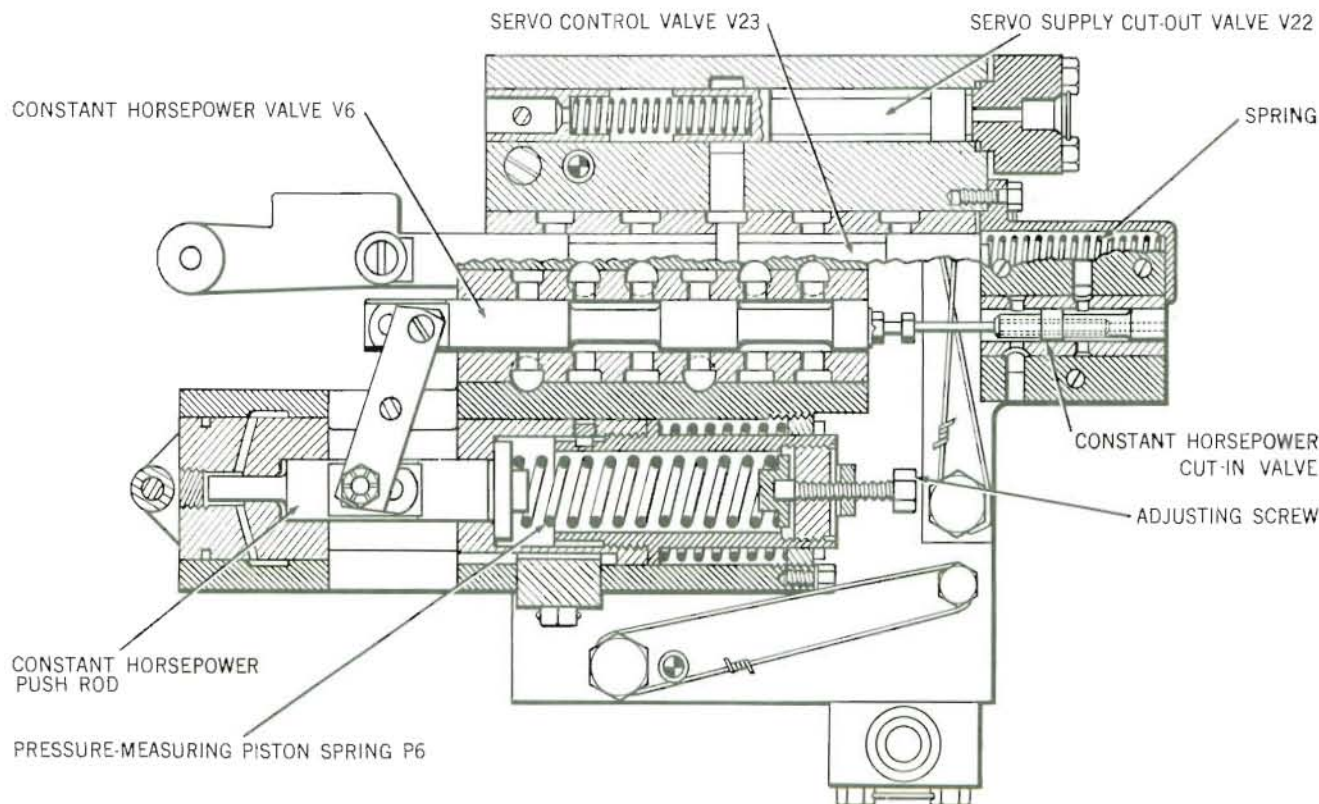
Elevating Gear Constant Horsepower Adjustment, Sectional View
